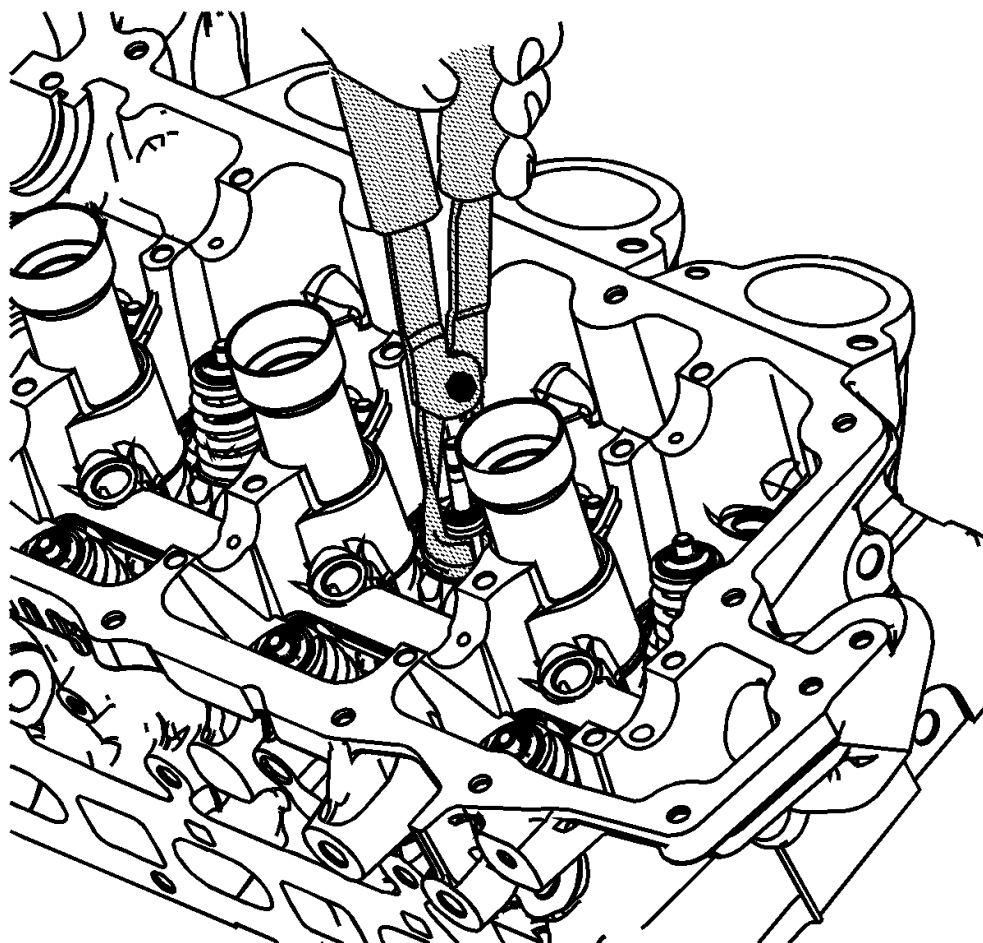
View of Special Tool EN 46116 & Cylinder Head
